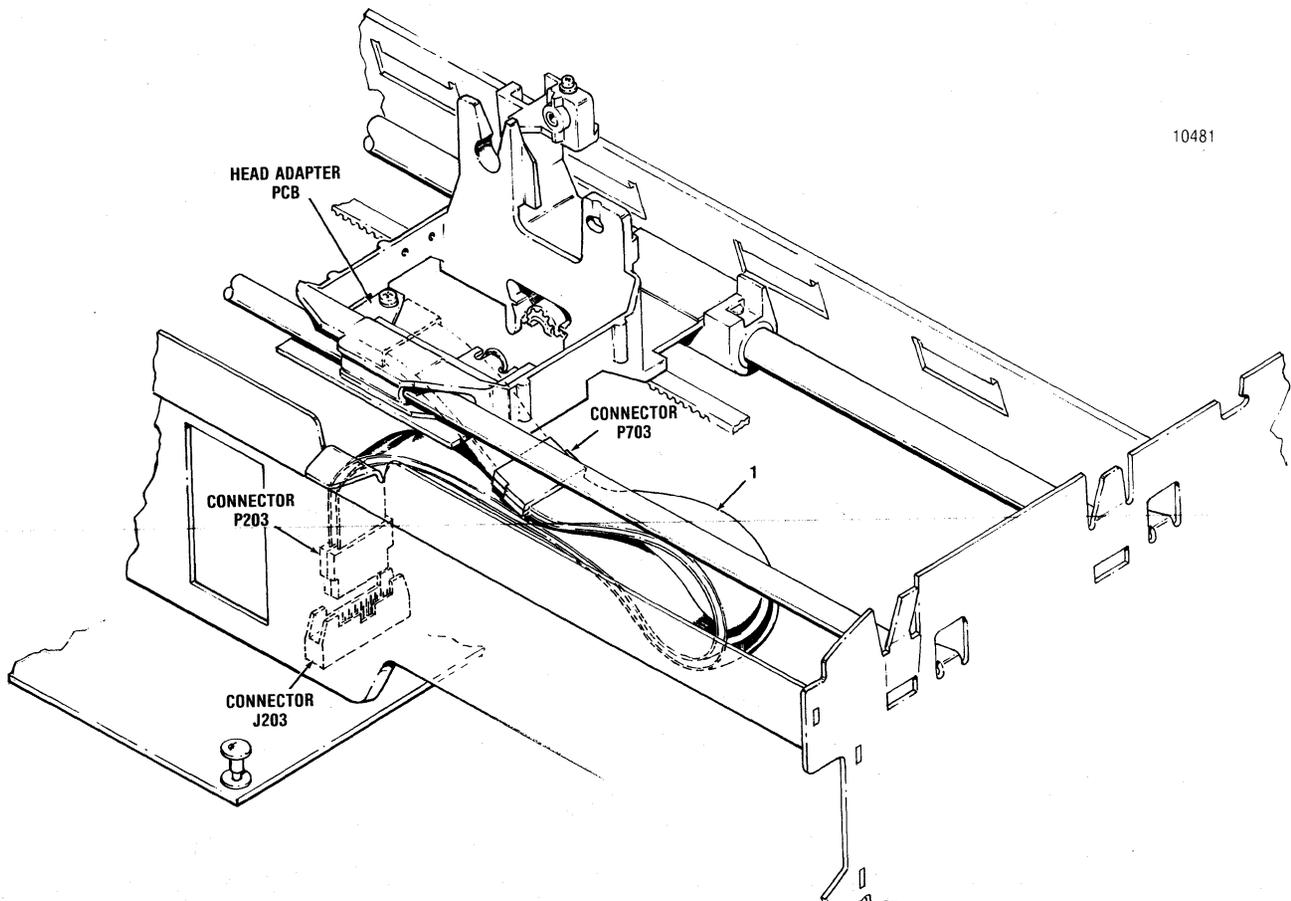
REMOVAL/REPLACEMENT, HEAD FLEX CABLE
